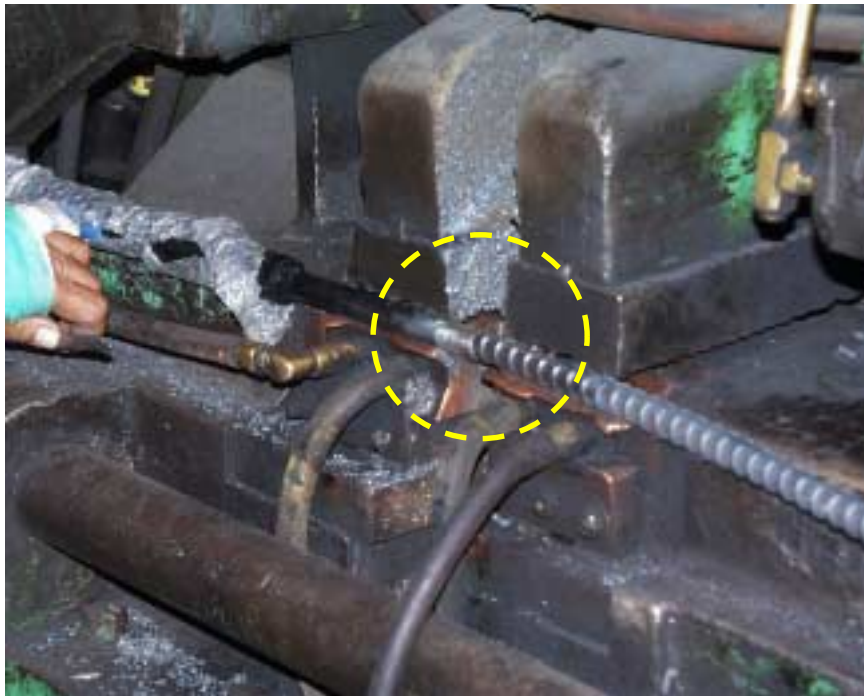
Welding of a Rebar Strain Gauge
